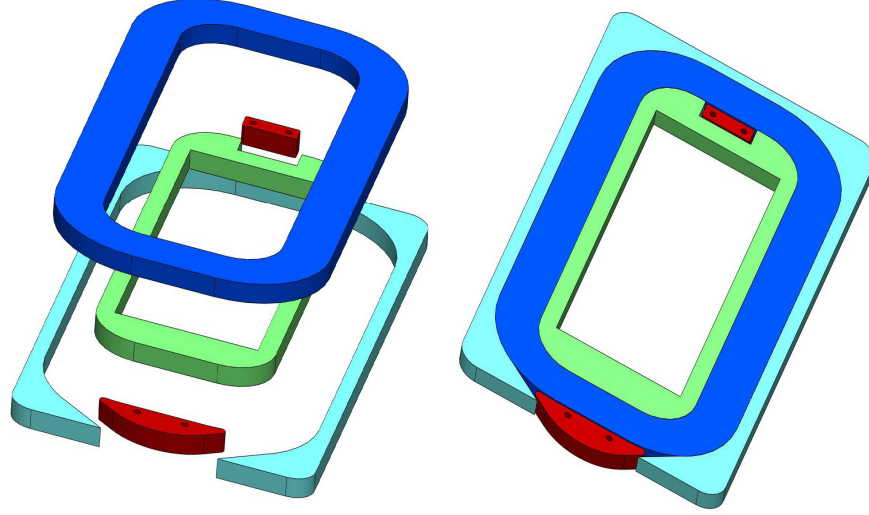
The 3D CAD illustration of the Superwind HTS coil design. - The HTS coil is shown in the exploded view at the left, making all parts identifiable. The inner and outer frames, green and light blue, respectively, are made from SS316L. The coil terminals, made from copper are colored red. The ends of the coils are positioned at both the outer and inner frame. The winding process was as follows: The inner frame was mounted on the winding machine. The insulated HTS tape was wound on to the inner frame. All access points for the measurement of the voltage and coils terminals have been soldered at appropriate place during the winding process. The outer frame was added to the wound coil, measurement wires are lead to the circuit board mounted on the outer frame (not shown in the figure) and coil is vacuum impregnated with the epoxy(5).
